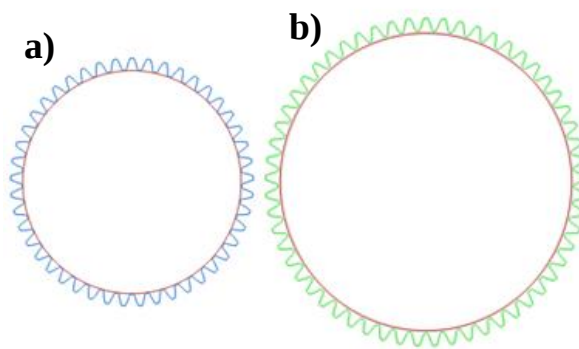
2D Gear Geometry of Gear Pair of 45 and 57: a) Pinion; b) Gear.
